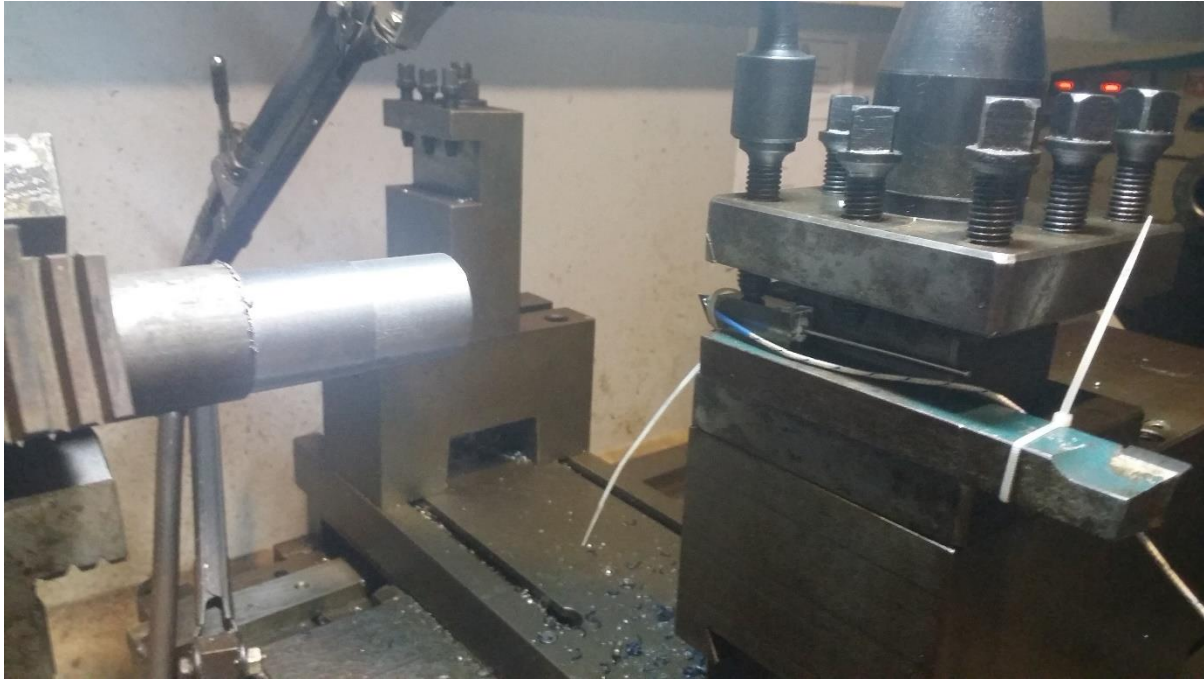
Machining of AISI 1045 with HSS tool with heat pipe installed
